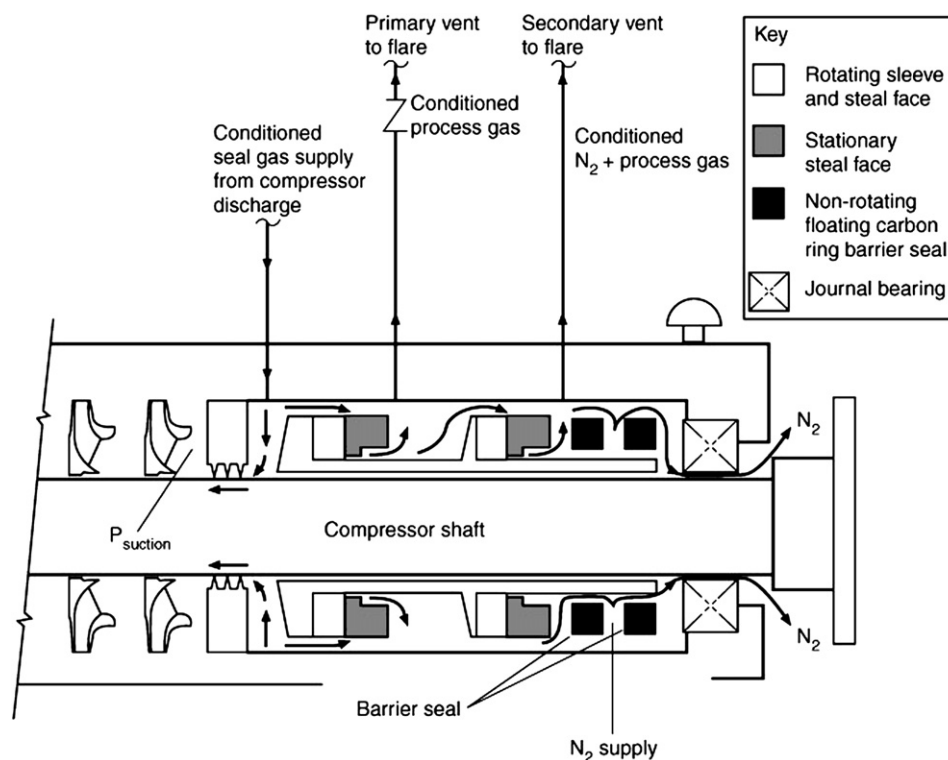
• Tandem seal and barrier seal typical housing arrangement
